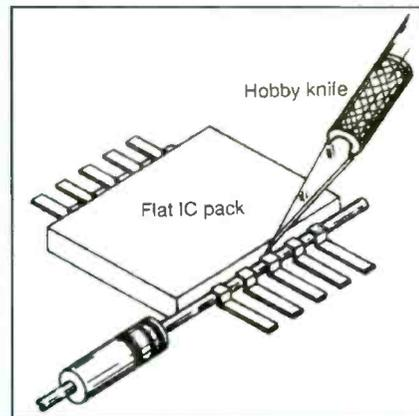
With a hobby knife, use just enough pressure to cut the pin between the heavy resistor or capacitor lead and the package.
